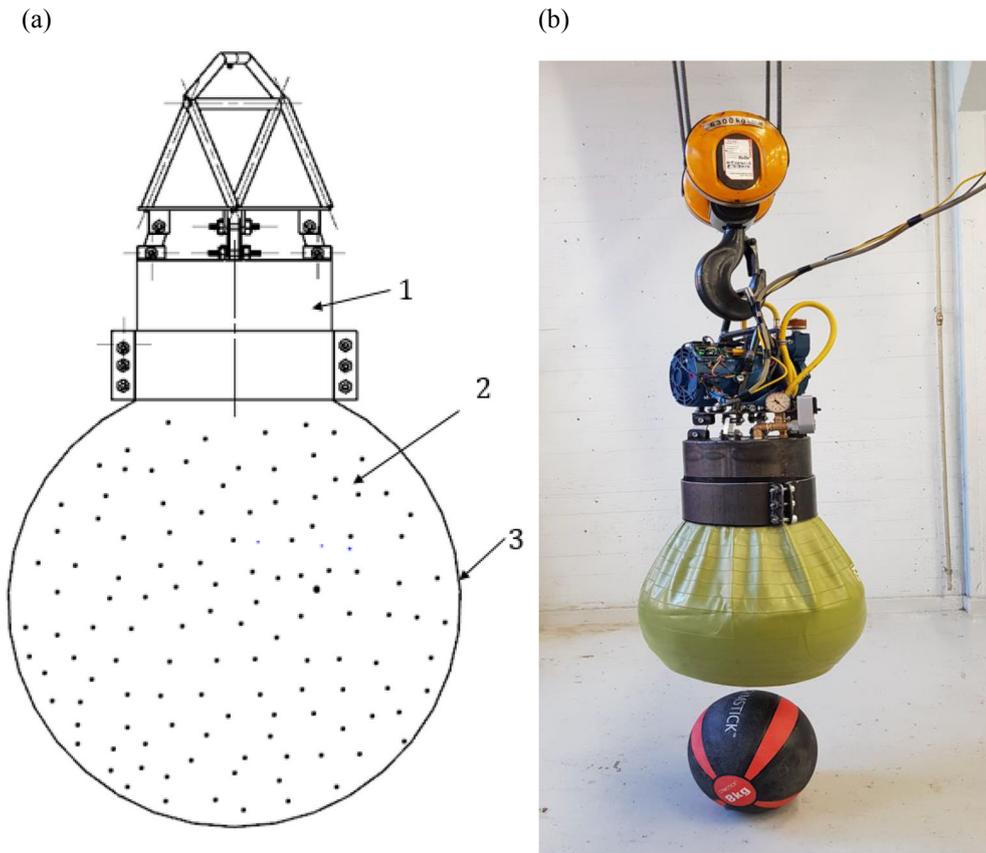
(a) Gripper configuration consisting of the following components: the frame body (1); granular material (2); and the gripper’s surface material (3). (b) Final gripper assembly with vacuum pump mounted on top.
